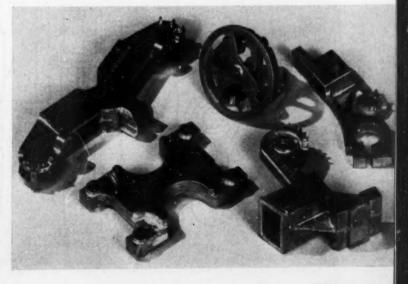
Above—Several parts of odd shape in which the holes have been cored
